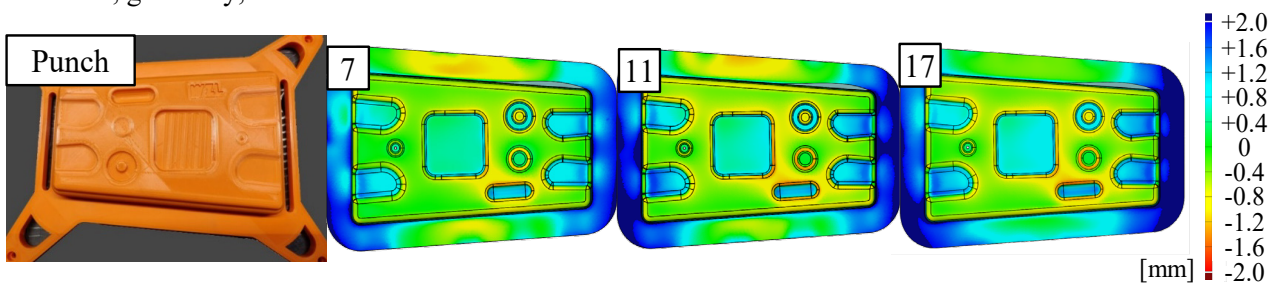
AM deep drawing tool and dimensional accuracy of sheet metal parts after forming operation 7, 11, 17
